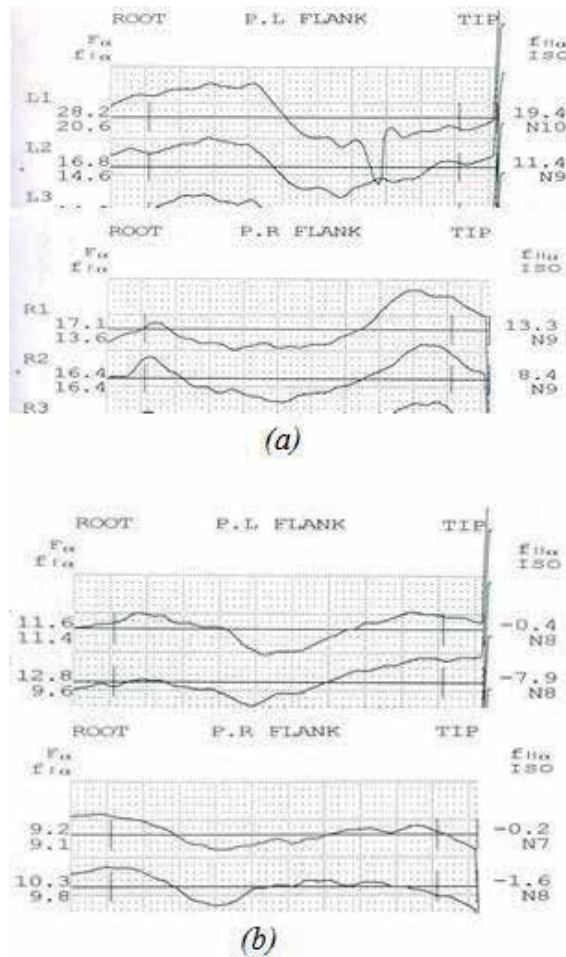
Measuring the gear profile error of the 300th machined gear by OSAKA SEIKI KIKAI gear measuring machine: (a) flood lubrication; (b) nanolubrication [20].
